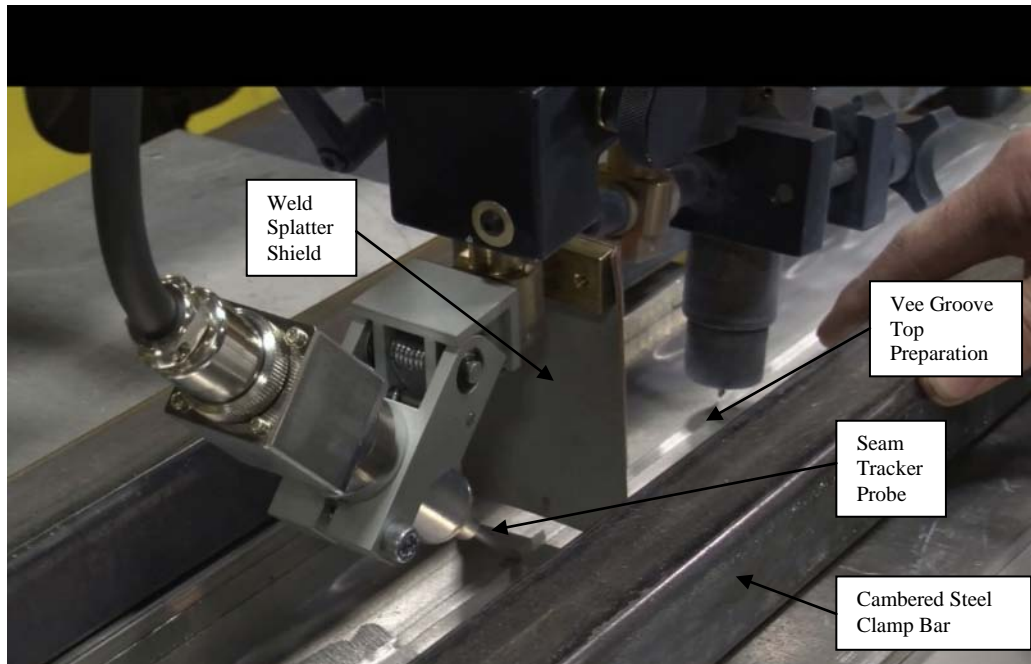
Torch and Seam Tracking Probe Engaged in Weld Seam
